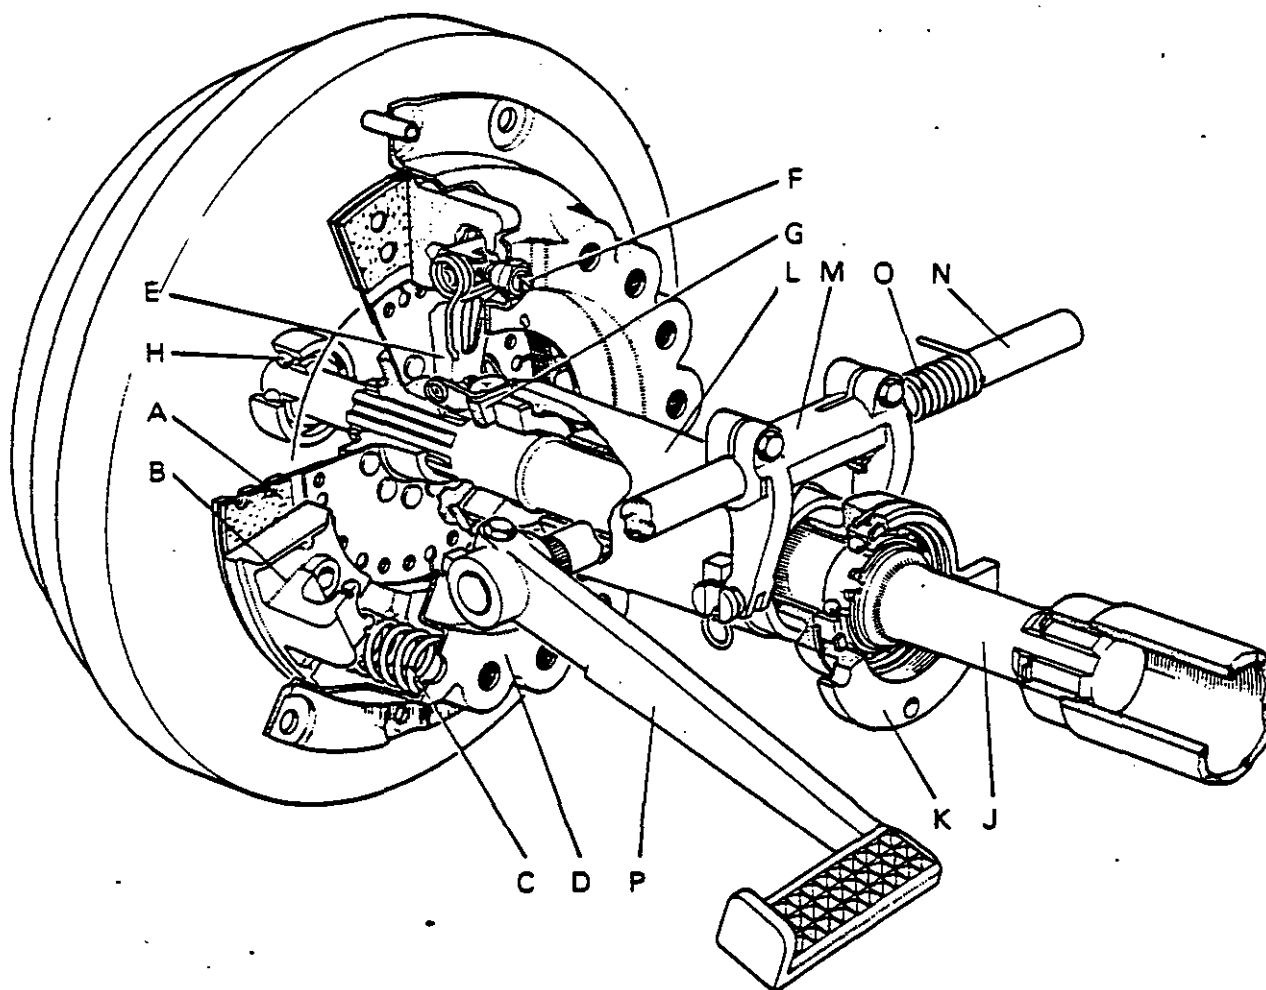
SINGLE PLATE CLUTCH — 770 TRACTOR
